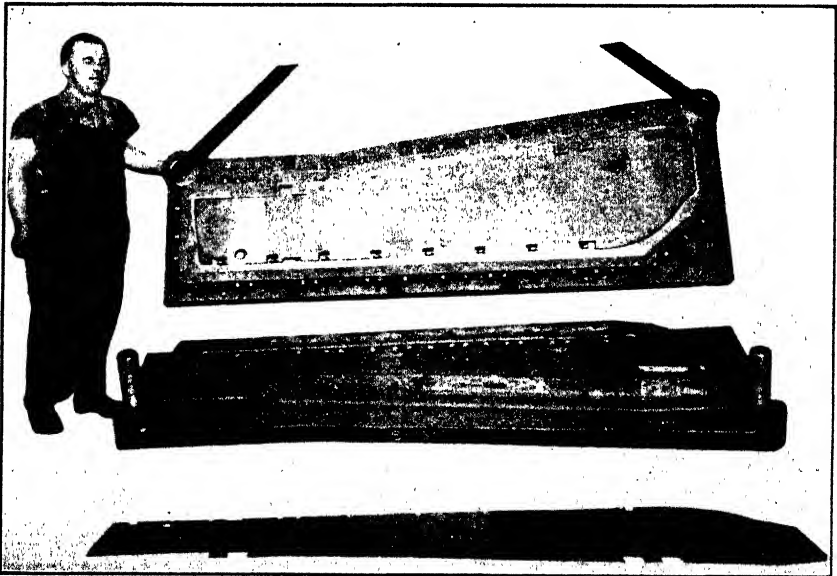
An inverted type blanking and piercing die for a running board. Guide pins, sectional cutting steels, spring knockout pad.
